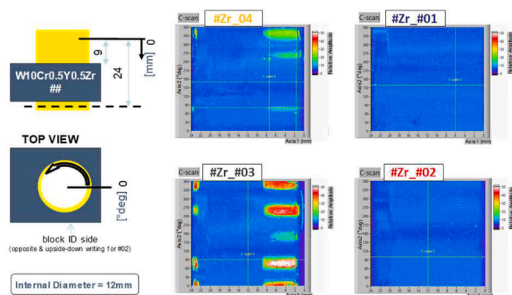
UT C-scans at the Cu interlayer of W-10Cr-0.5Y-0.5Zr blocks after OFHC-Cu casting.
